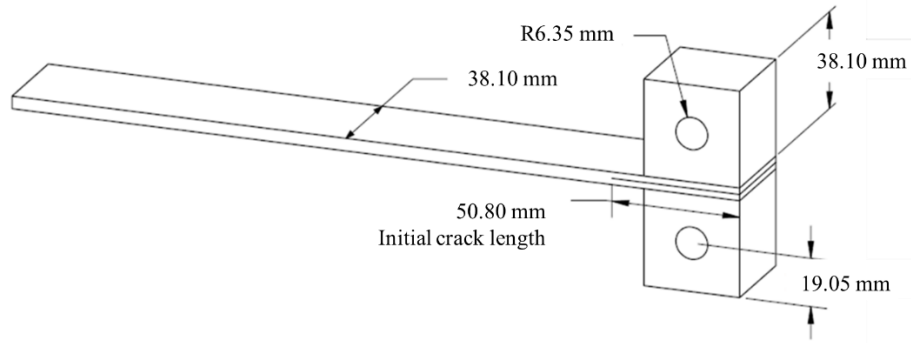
Double cantilevered beam (DCB) specimen schematic.
